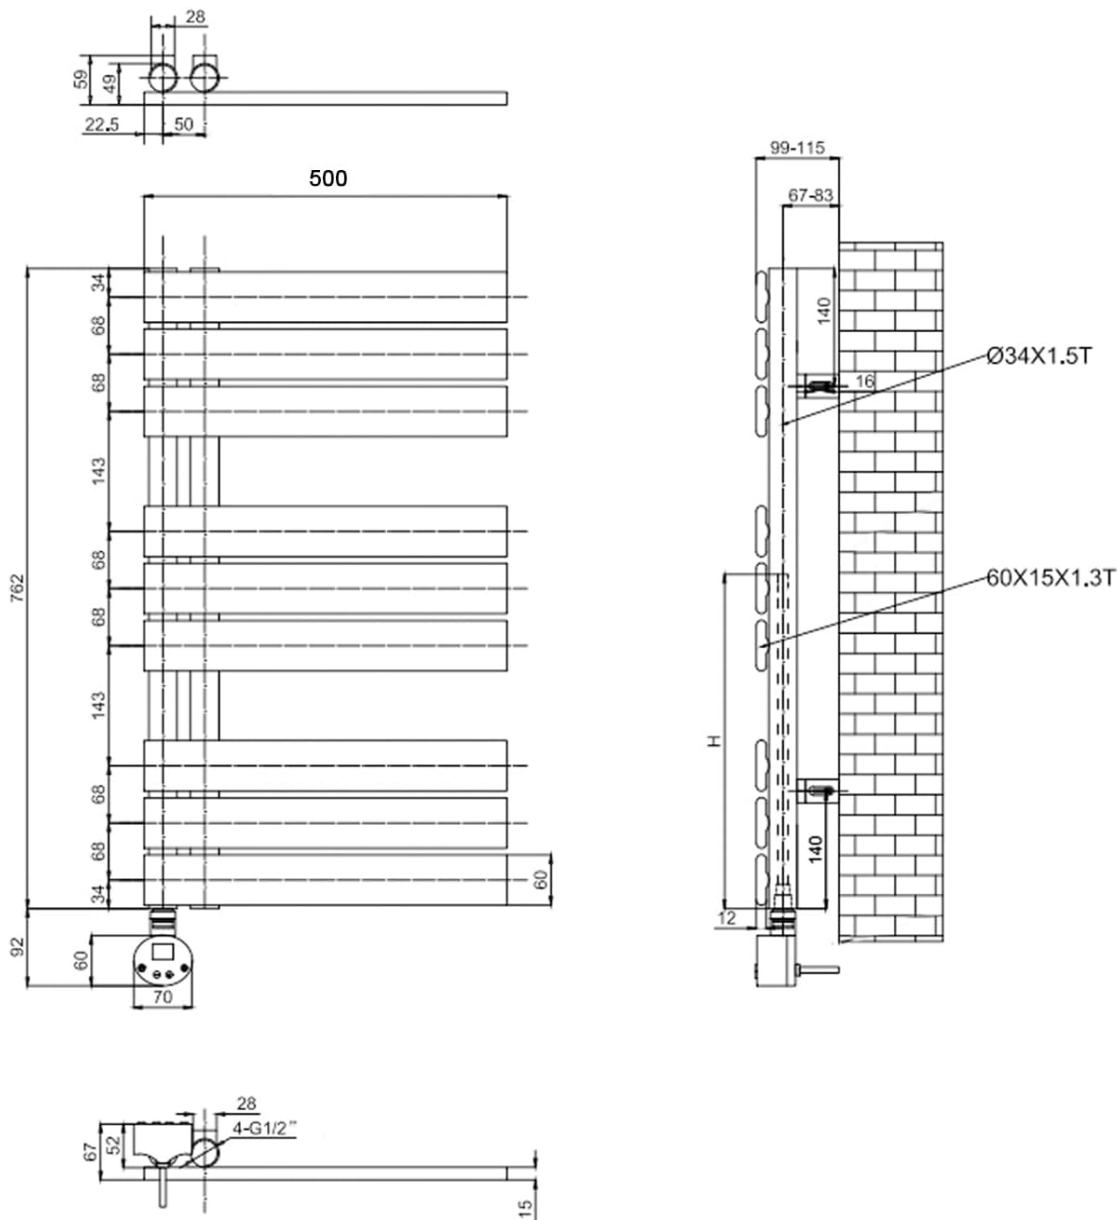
Technical drawing showing detailed dimensions (in mm) of the towel warmer, including height, width, bar spacing, and wall mounting points.
